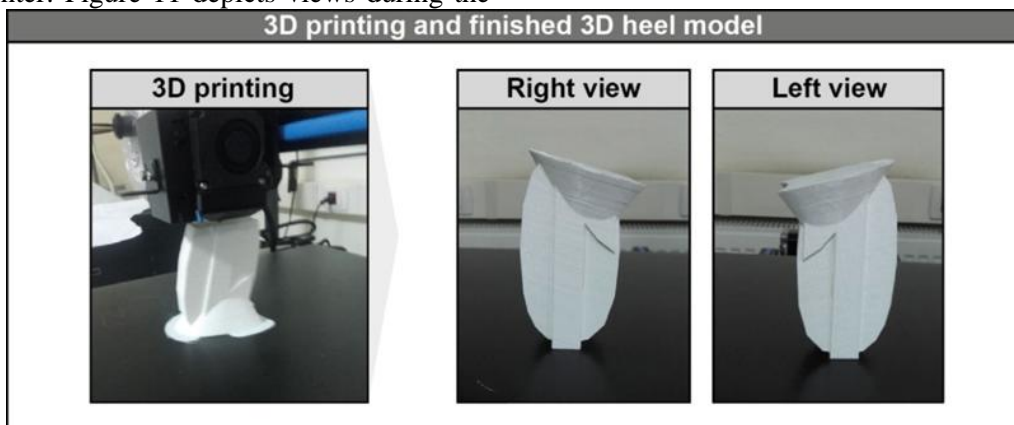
3D printing of heel model. Right and Left view of the finished heel
